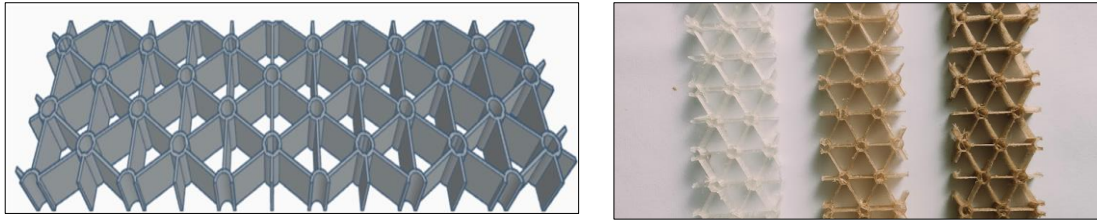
Model and 3D printed specimen of Beetle wing inspired Honeycomb cell core
